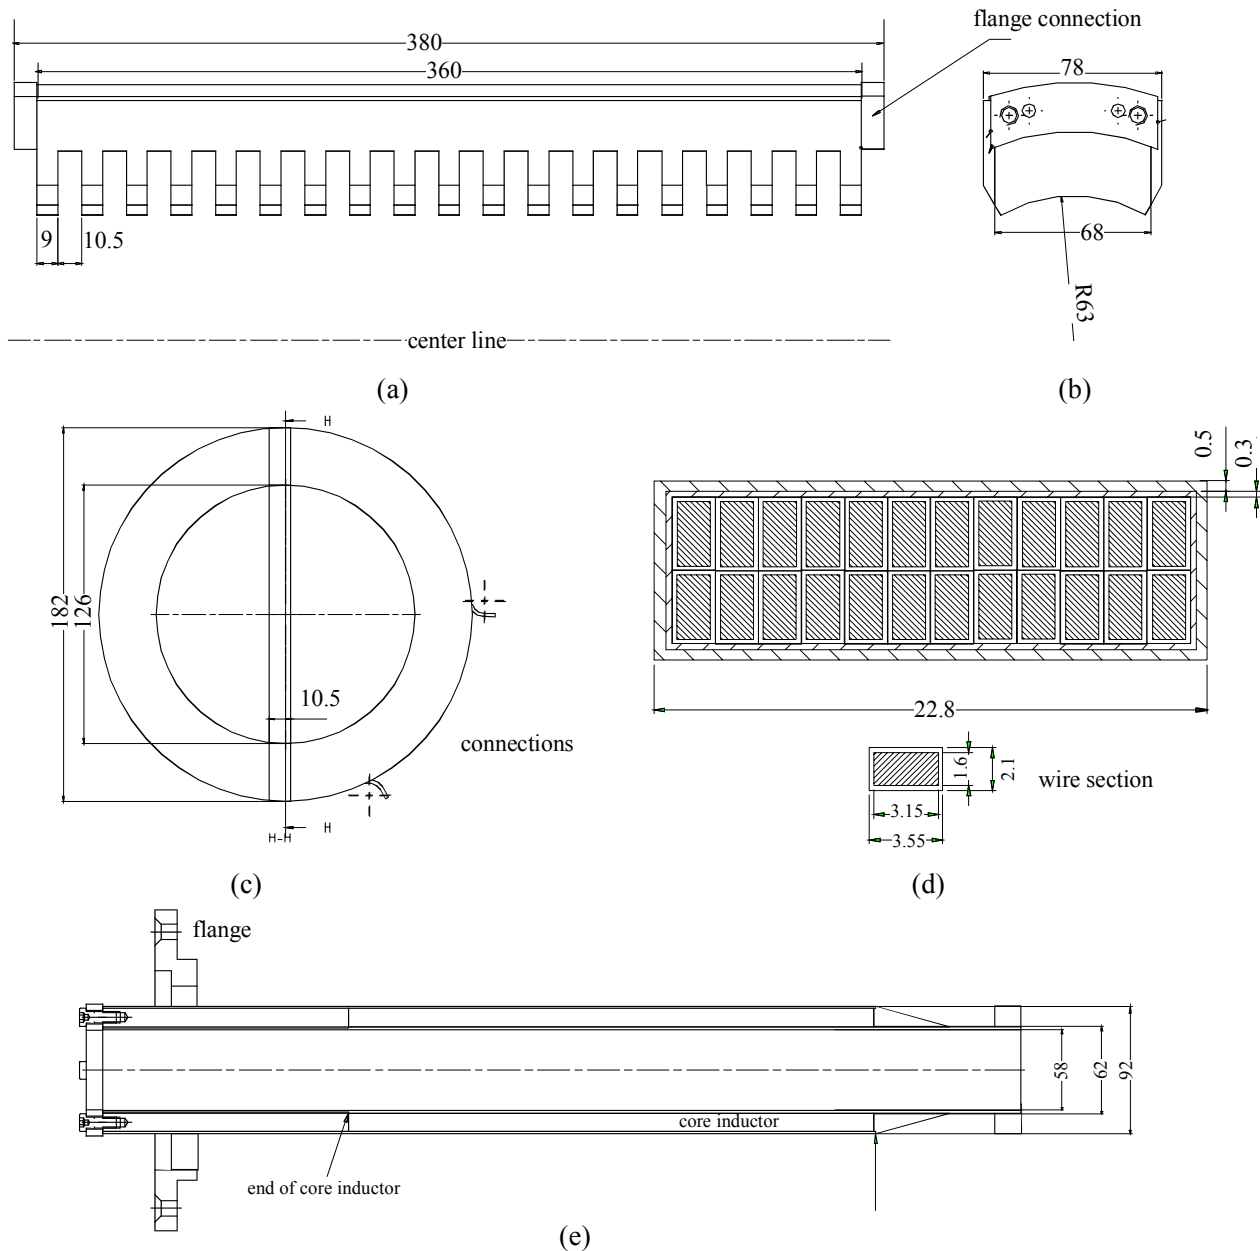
Technical sketch of the main pump of the Riga tandem unit. (a) Iron package consisting of 678 steel sheets. (b) extension of the ferromagnetic iron package. (c) Coil system and its connectors. (d) cross sectional cut through one coil package and wire dimensions. (e) Inner core inductor and its dimensions.
